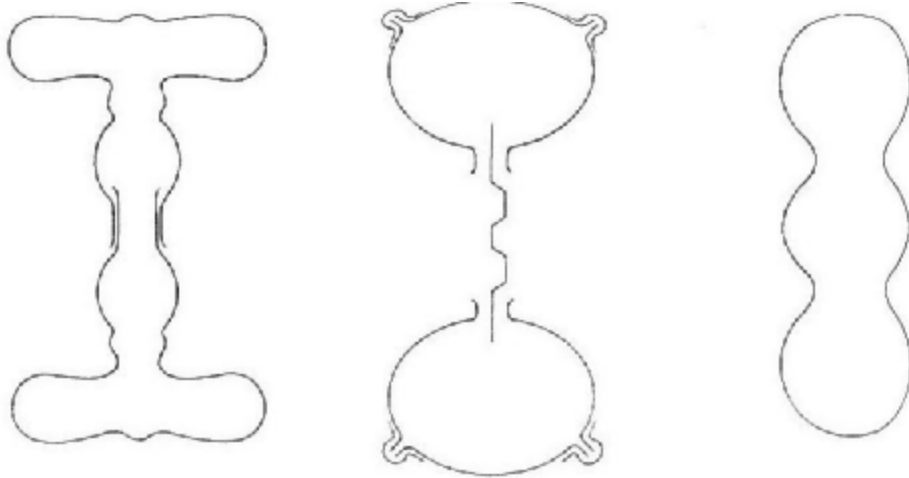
Typical spar sections fabricated from thin steel sheet
